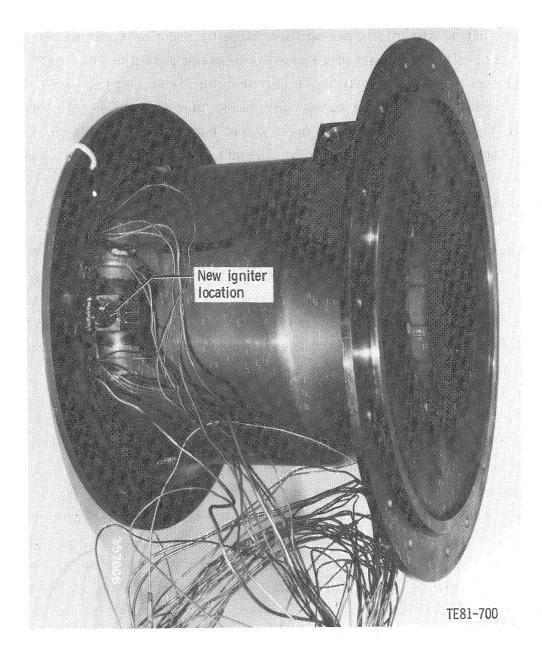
Back half of rich zone showing new torch igniter location against flange.
